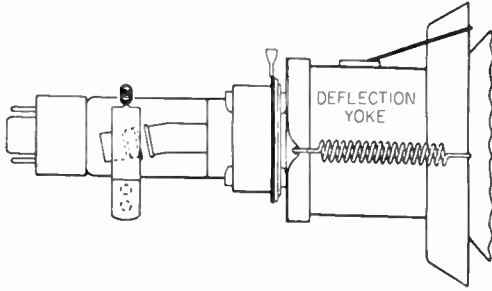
Typical assembly on the neck of a cathode-ray tube. The deflection yoke is identified
